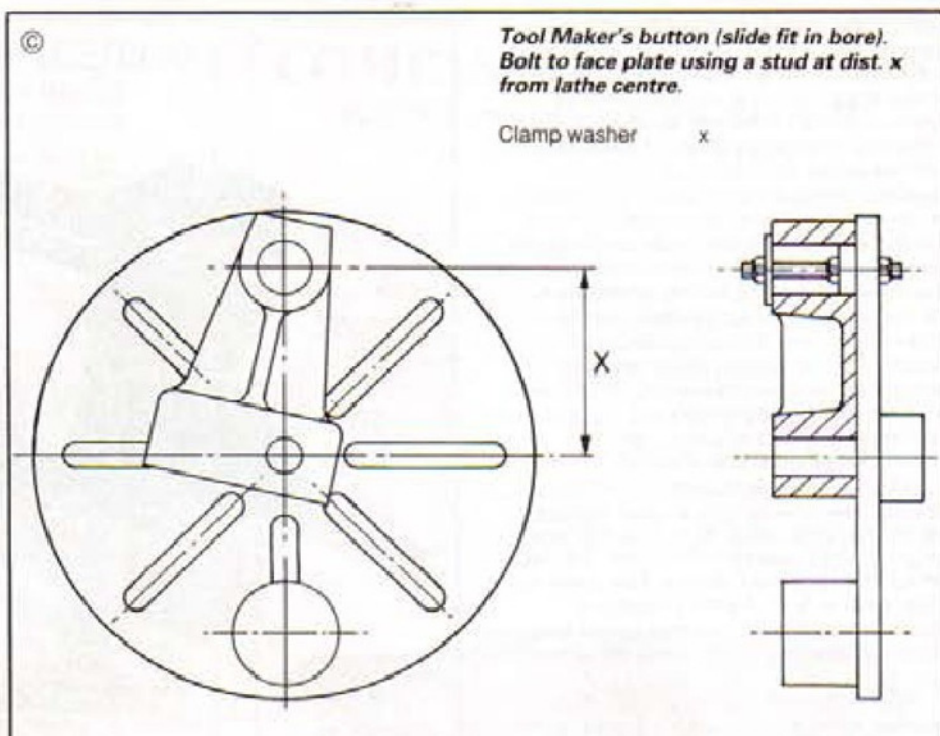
Set first 0.75 inch hole in line with lathe centre line, clamp and machine bore to size. Set up the second casting as above but facing in the opp. direction to make a matched pair and machine its bore.
